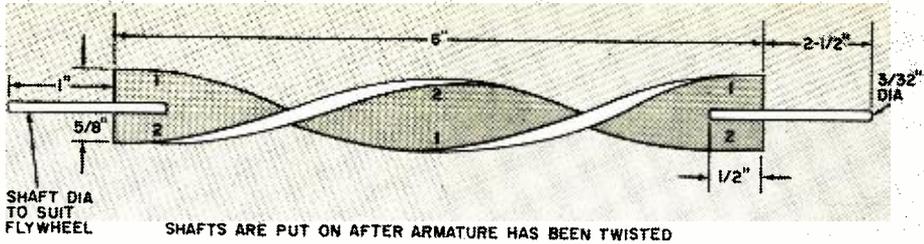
The lengths of the shafts on each end of the soft iron armature should be long enough to accommodate the flywheel on one end (about 1"), and the cams and spacers on the other end (about 2½").
